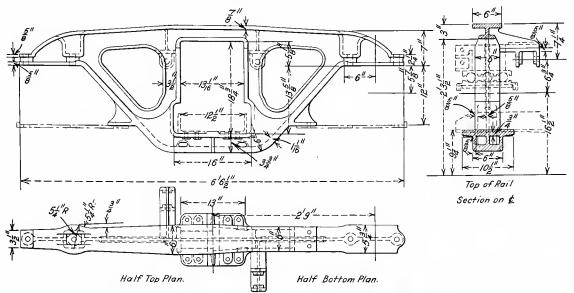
Cast Steel Truck Side Frame for Baltimore & Ohio 70-Ton Capacity Freight Cars. Buckeye Steel Castings Company.
